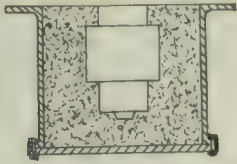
DRAG PART ON LOWER END OF COLUMN.
